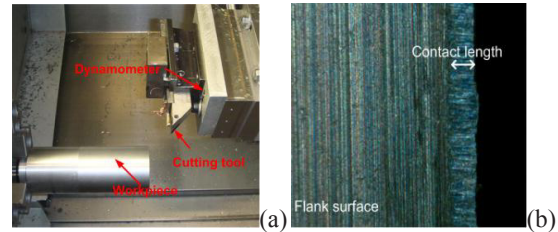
(a) Test setup (b) Contact length on the flank face.
